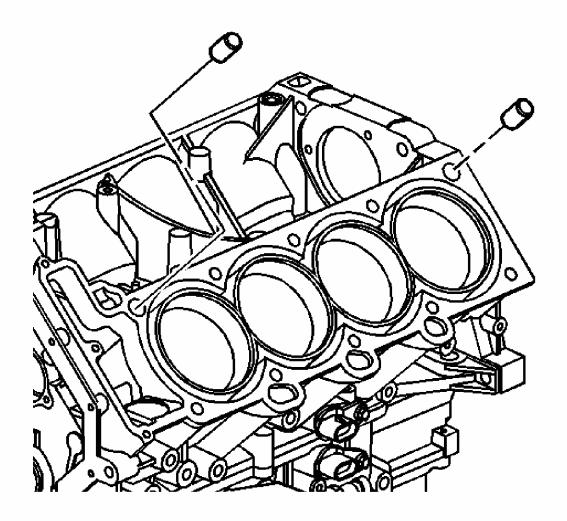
Identifying Cylinder Head Locating Pins Courtesy of GENERAL MOTORS CORP.
